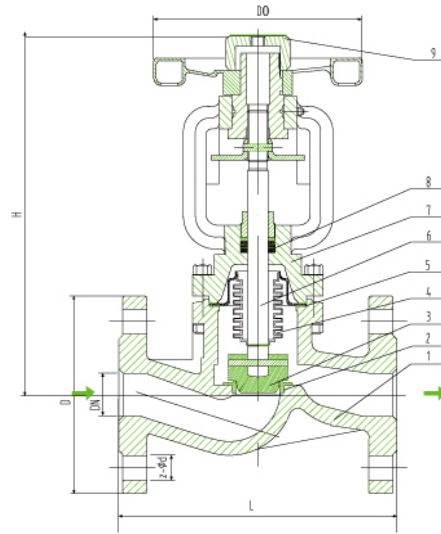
Bellows Sealed Globe Valve (Flanged)
